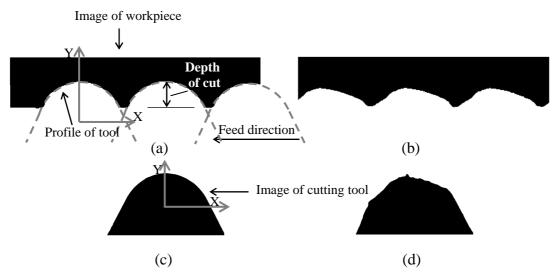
(a)-(b) Images of surface profiles of workpieces and (c)-(d) images of cutting tool used.
